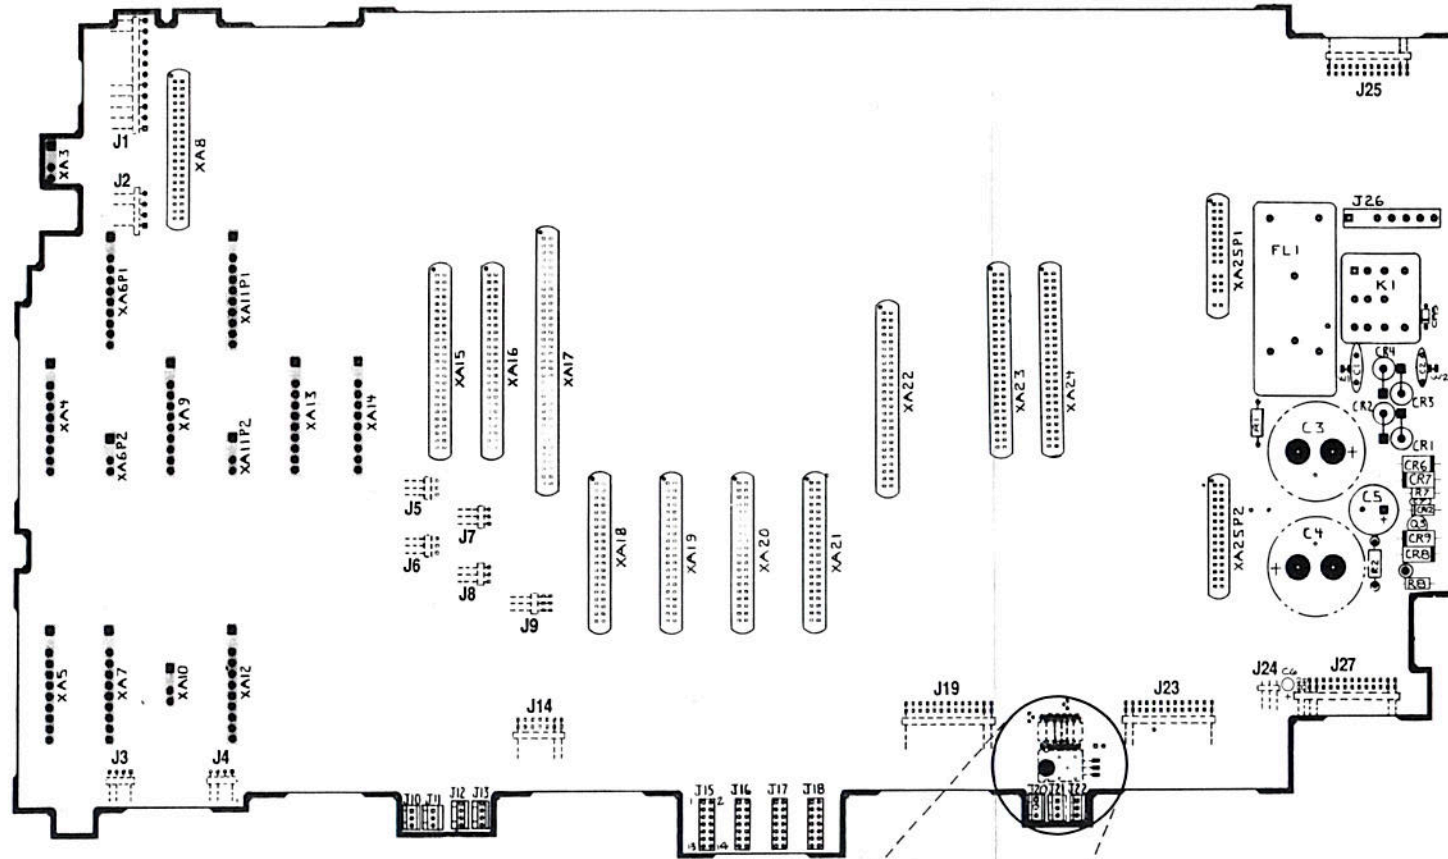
P-4. A28 Motherboard PCB Schematic Diagram (Sheet 1 of 2) 6700-D-31728-3 (Rev. D)
